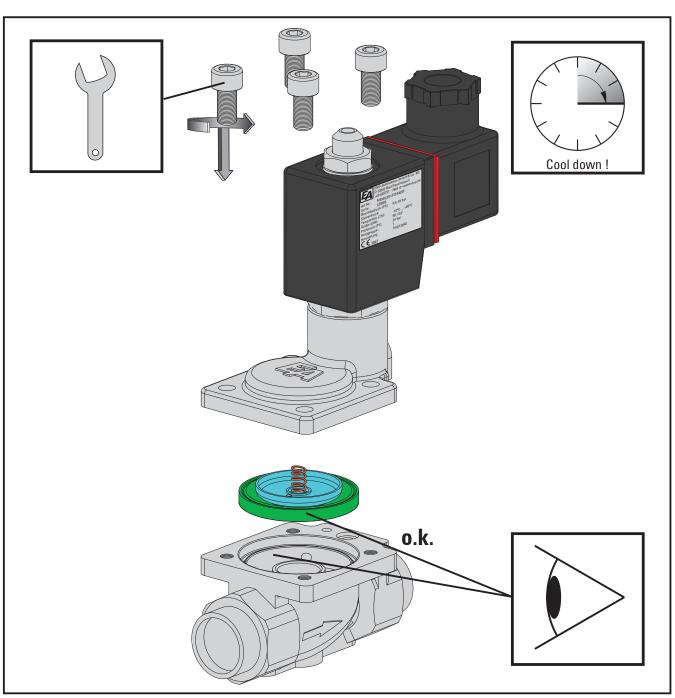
Mounting / disassembly - Welded connection, mounting of the valve top
